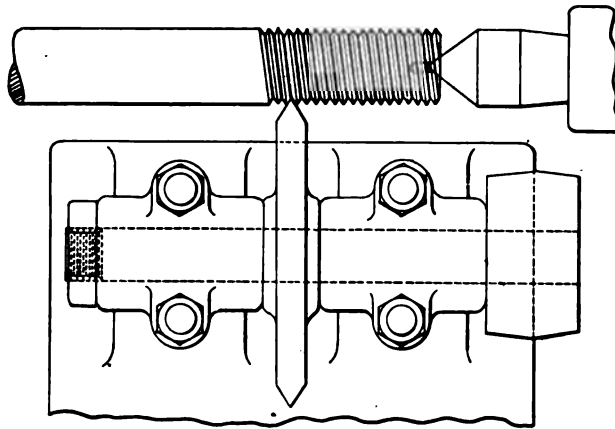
illustrates a method used for threading studs, pins, etc., of manganese steel, this material being so hard that it cannot be cut by any kind of tool steel. A plain, hardened tool steel disk, having the edge made according to the angle of thread, is employed. This disk is revolved at a high speed, and at the same time forced into the work, which is revolved slowly. Due to the friction between the edge of the disk and the work, and the softening of the material, owing to the heat generated by the friction, the disk wears away the stock, and, by means
